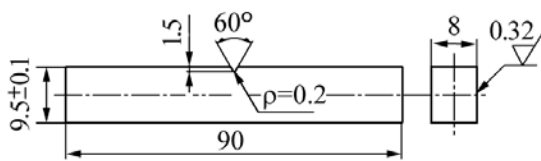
Specimen for fatigue crack growth tests, dimensions in mm.
